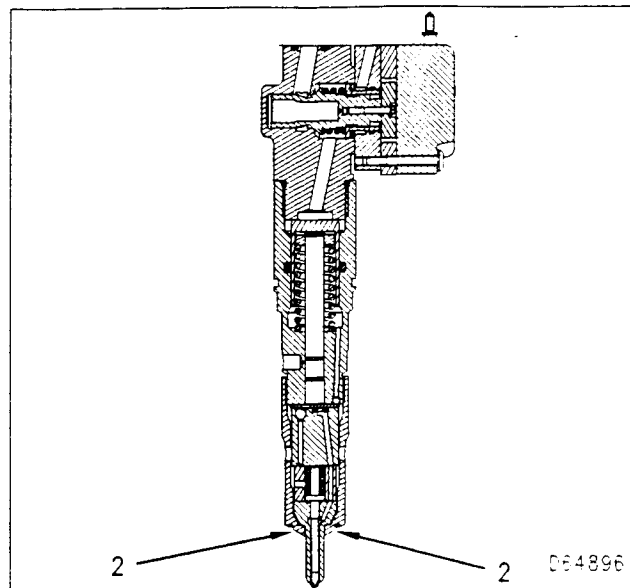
Typical Unit Fuel Injector. Entire lower portion of injector should be clean, especially (2) lower O-ring groove and adjacent surface.
